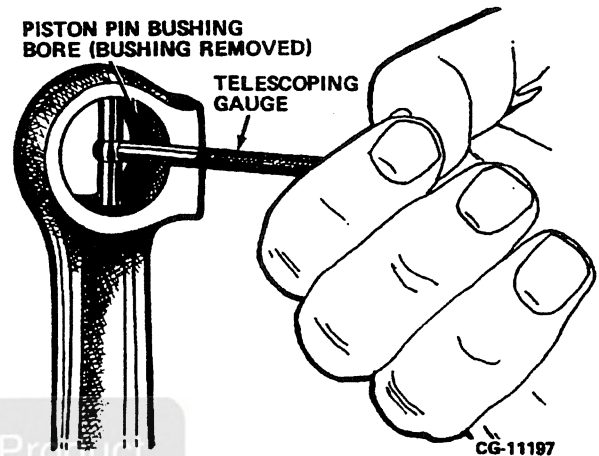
Checking Connecting Rod Piston Pin Bushing I.D.
